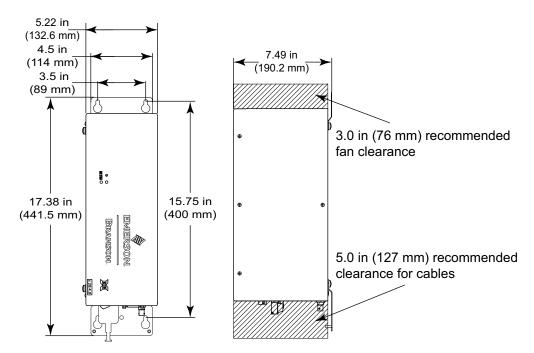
DCX V Power Supply Benchtop Dimensional Drawing
